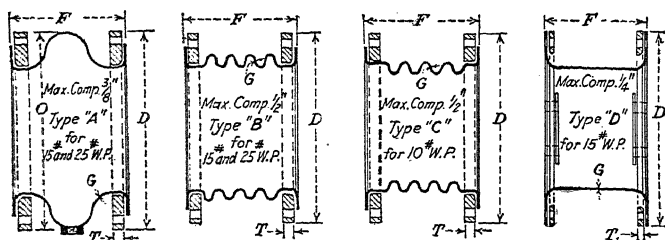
Copper expansion joints for low pressure. Types A, B, and C flanges swivel; Type D flanges do not swivel.
